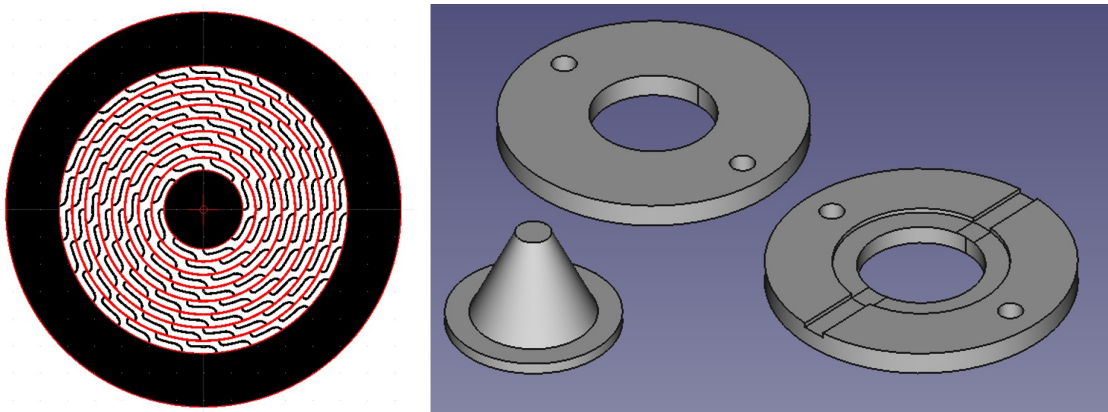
2D layout of a Faraday cage (left) and auxiliary tools for extruding it into 3D (right).
